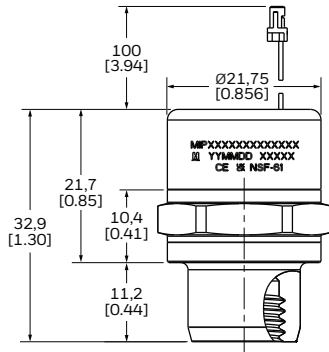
MOUNTING DIMENSIONS (FOR REFERENCE ONLY. MM/[IN])
